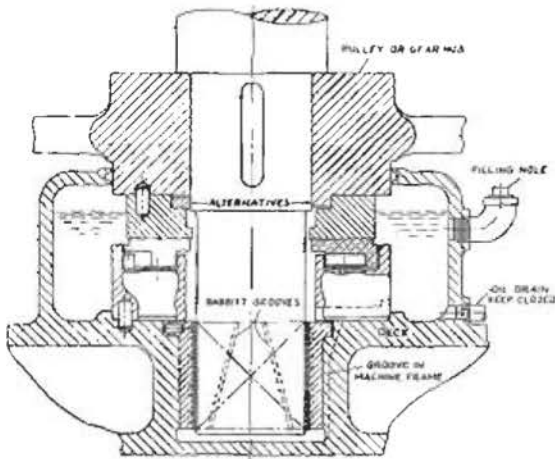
Mounting for supporting heavy gear or pulley. Bearing shown may be Style KV or LV.
